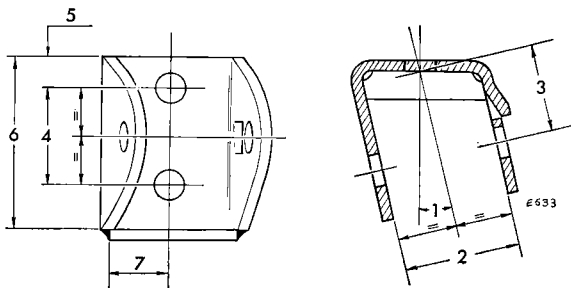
Herald 1200, 12/50, 13/60 and Vitesse rear suspension radius rod
